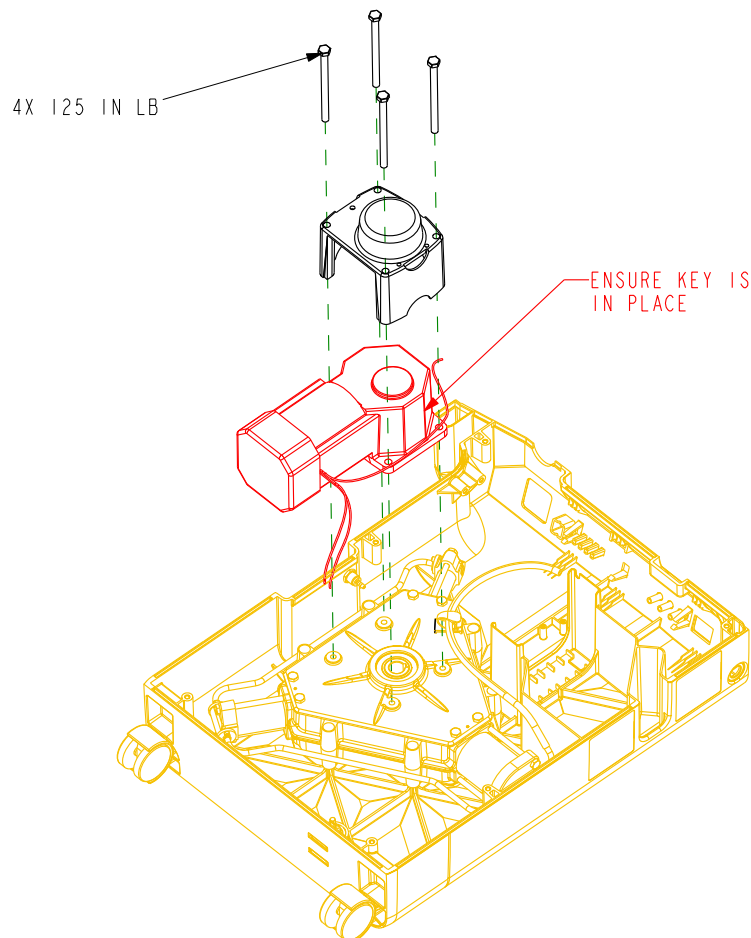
MOTOR/MOTOR COVER PLACEMENT
